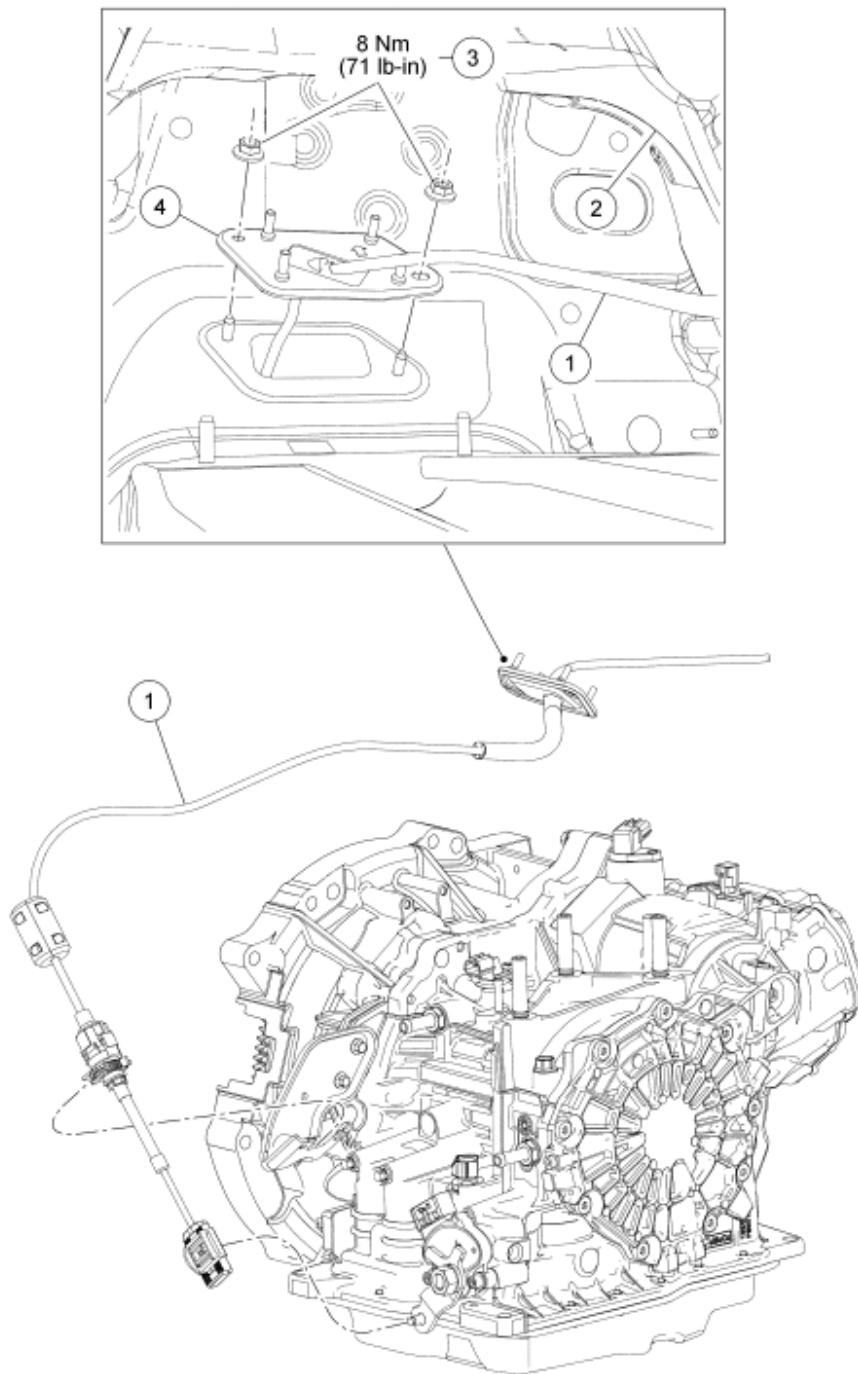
Exploded View Of Selector Lever Cable With Torque Specification - 6-Speed Transaxle
